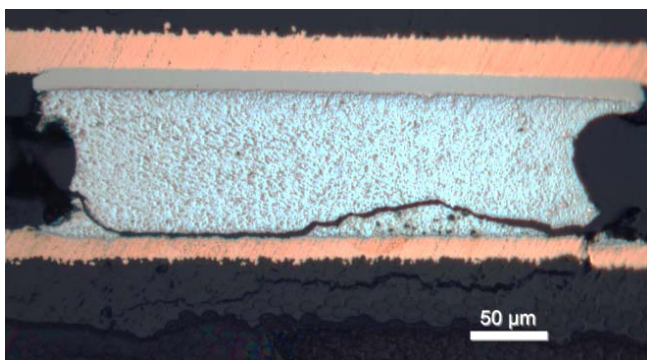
Representative failure mode for bulk solder failure of LGA joints on Cu-OSP PCB surface finish.
